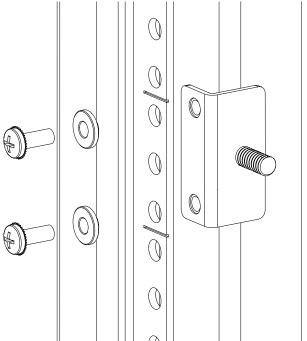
Installing the rear mounting brackets (HP System/e rack-left rear upright)
